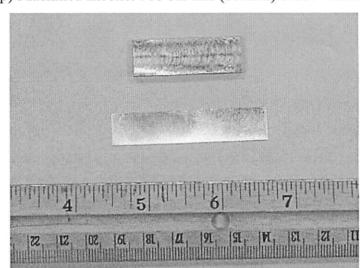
(top) Machined Inconel 718 bar and (bottom) 0.007" thick Kovar piece.
